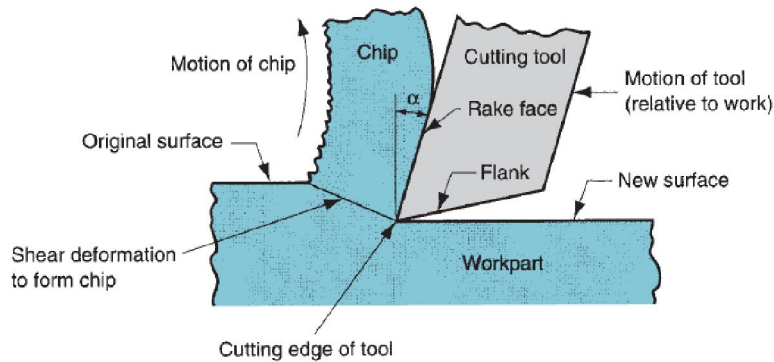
Geometry of milling process showing the workpiece, cutting tool, newly formed surface, chip and different angles (adapted from (Groover, 2010)). α is the rake angle which specifies the direction of chip flow. The angle β between flank and the new surface is called the clearance angle.
